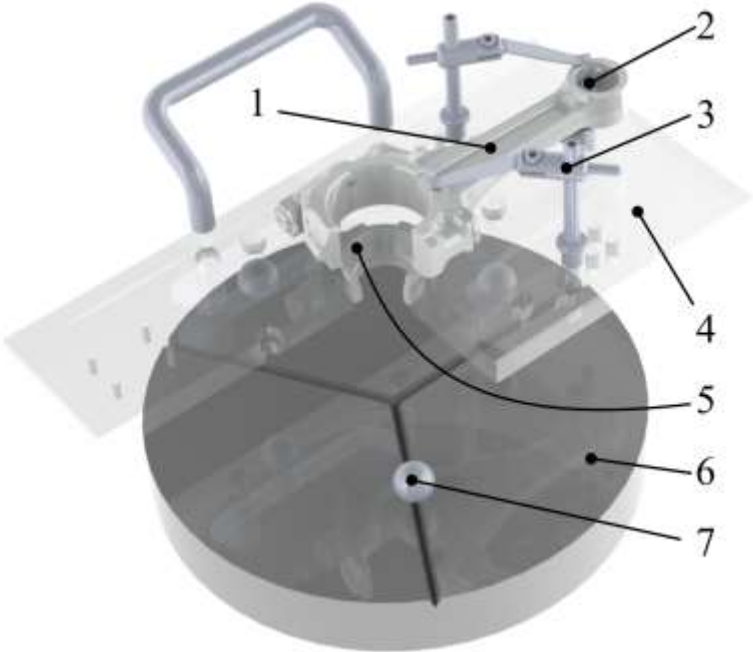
Talyrond support: 1. Connecting rod; 2. Pin; 3. Flexible Lamella Clamp; 4. Plate; 5. Centring sleeve; 6. Turning Table; 7. Ball Bearing Sphere
